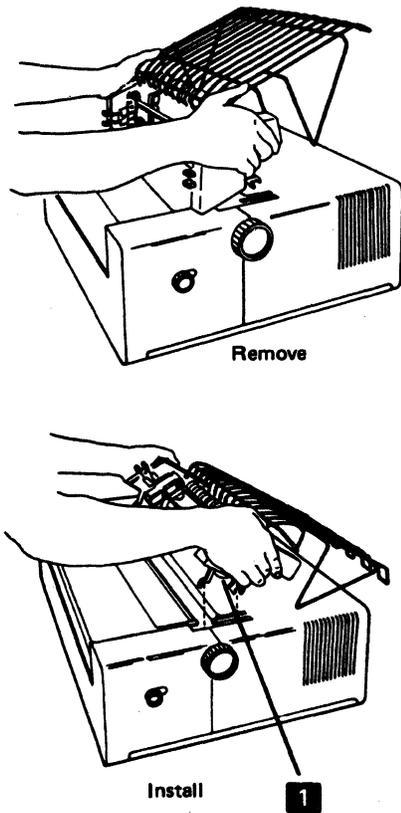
Forms Tractor Unit Removal and Installation
